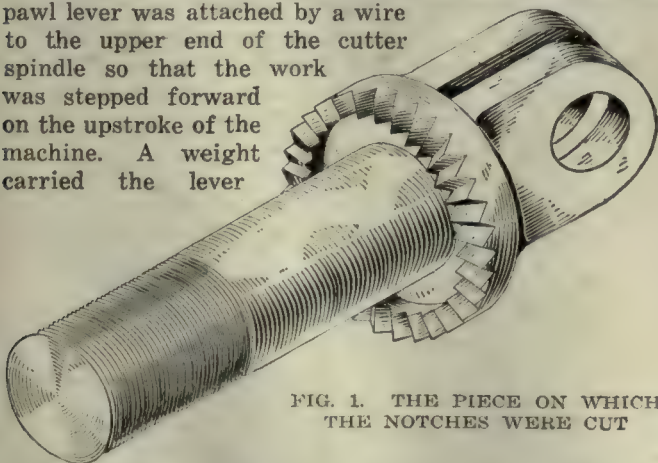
THE PIECE ON WHICH THE NOTCHES WERE CUT
